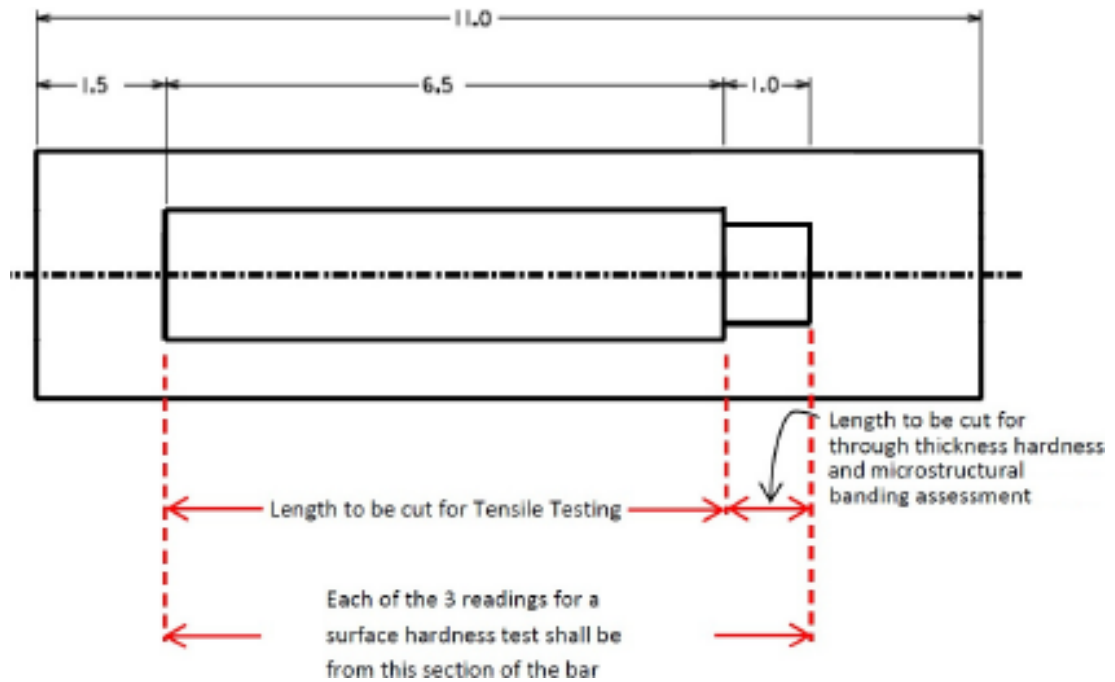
Test Bar Drawing Detailing Sample Test Locations
